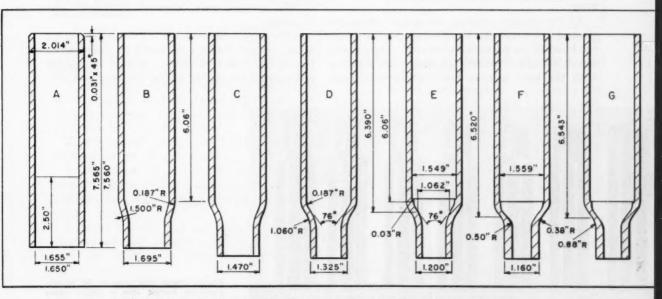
Progressive shapes to which tube is drawn in forming a Venturi end on the motor body for a 3.5-inch bazooka rocket
